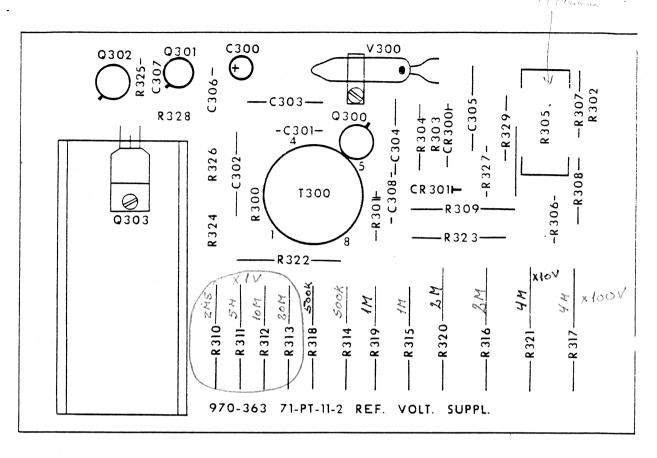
J3 Voltage Supply Printed-circuit Board, code 900-372.
